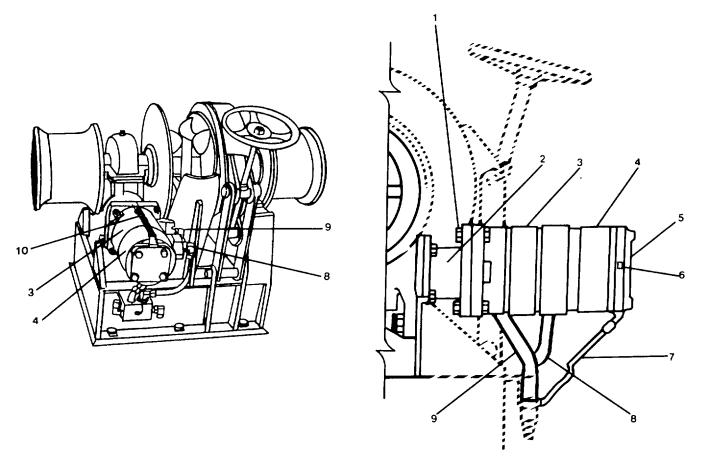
Failsafe Brake and Hydraulic Motor Assembly.
